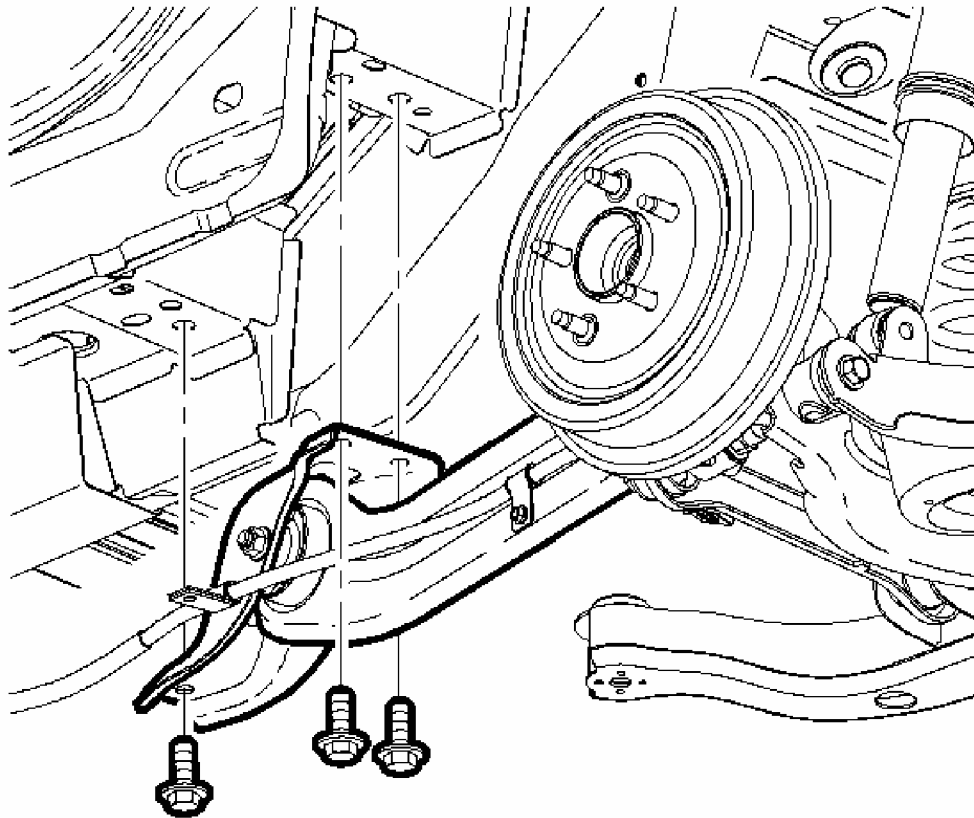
View Of Trailing Arm Bracket To Body Bolts
